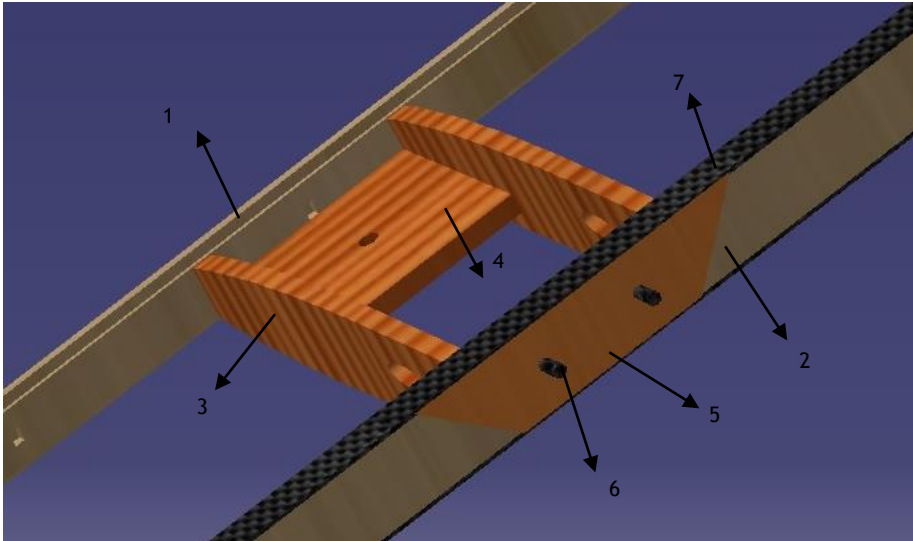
Connection structure (1-Leading edge; 2-Spar; 3-Rib; 4-Screw reinforcement; 5-Spar reinforcement; 6-Carbon fibre rod; 7-Carbon fibre strip).
